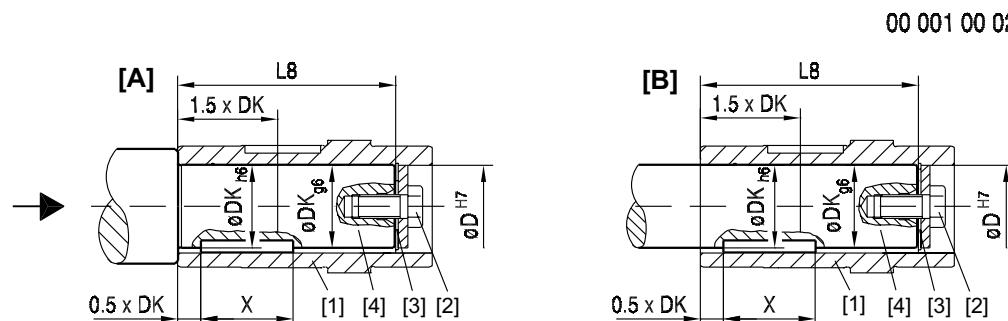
Customer shaft with contact shoulder (A) and without contact shoulder (B)
